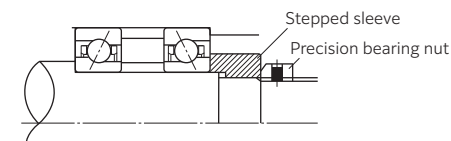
Tightening with stepped sleeve + precision bearing nut
